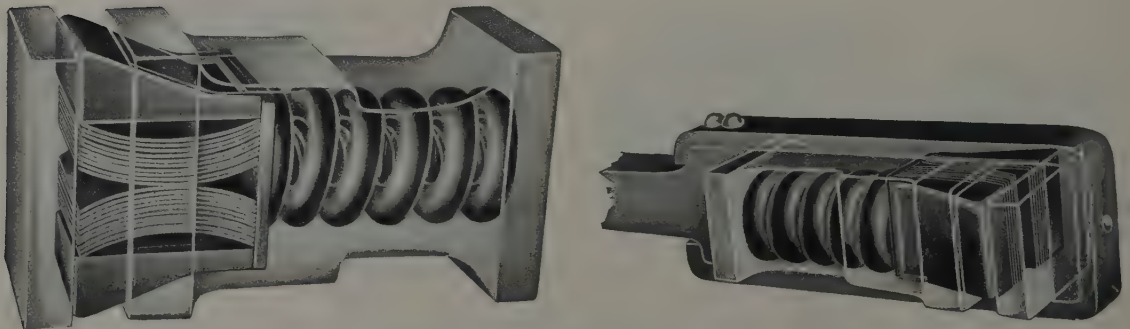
Gould Heavy Type Friction Draft Gear No. 175. Gould Coupler Company.
